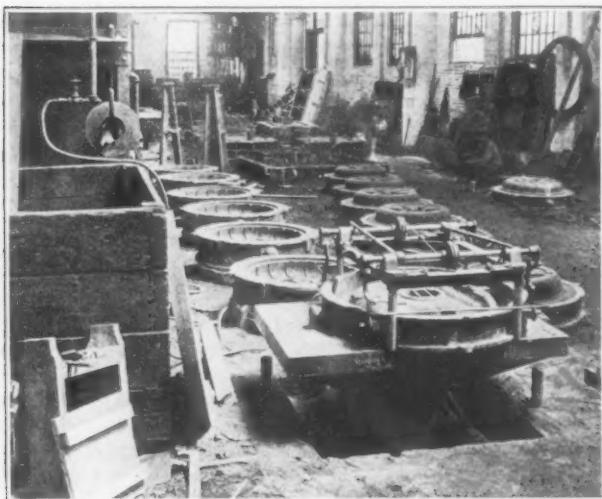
What a Molding Machine Can Do in a Jobbing Foundry
